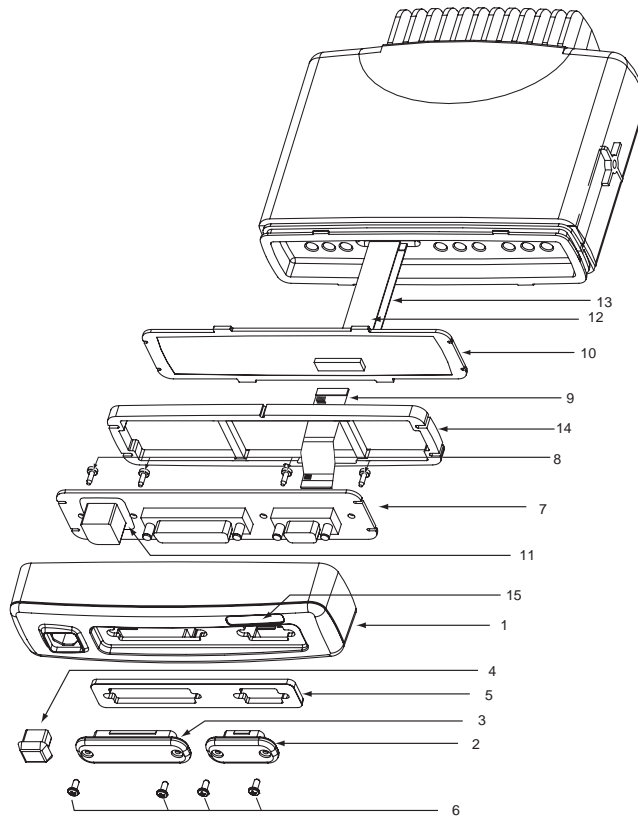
Data Expansion Head Enhanced – Exploded View
